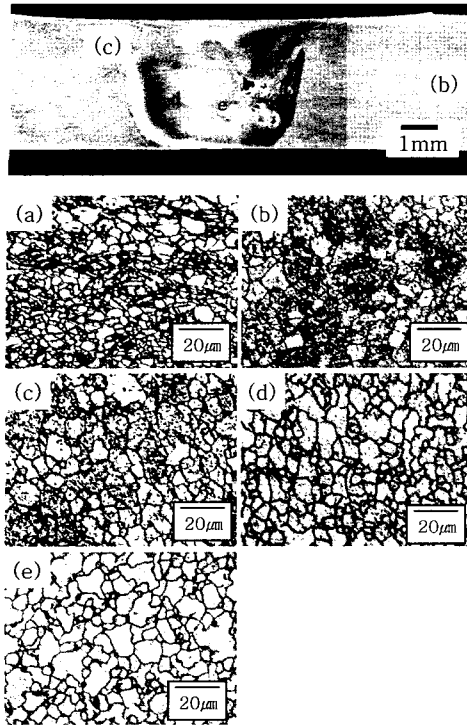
The optical microstructures of friction stir welded joint at 1600rpm, 267mm/min. (a) Base Metal, (b) HAZ, (c) TMAZ, (d) and (e) SZ
